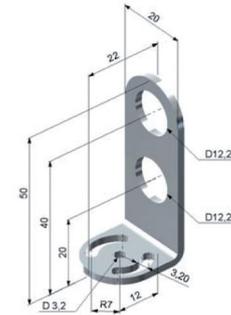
Double-hole mounting bracket [TM-FB2-CT]
